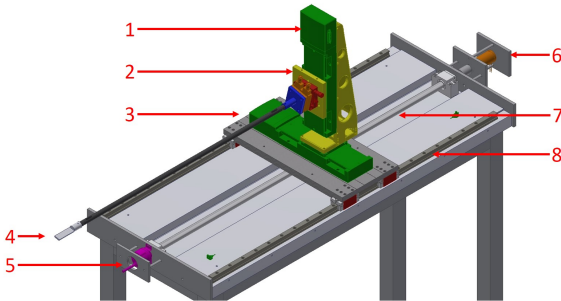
SLS-2 measurement bench assembly with 1: commercial linear stages, 2: rotation and tip-tilt stages, 3: slide, 4: sensor support, 5: rotary encoder, 6: motor, 7: ball screw, 8: linear guides.
